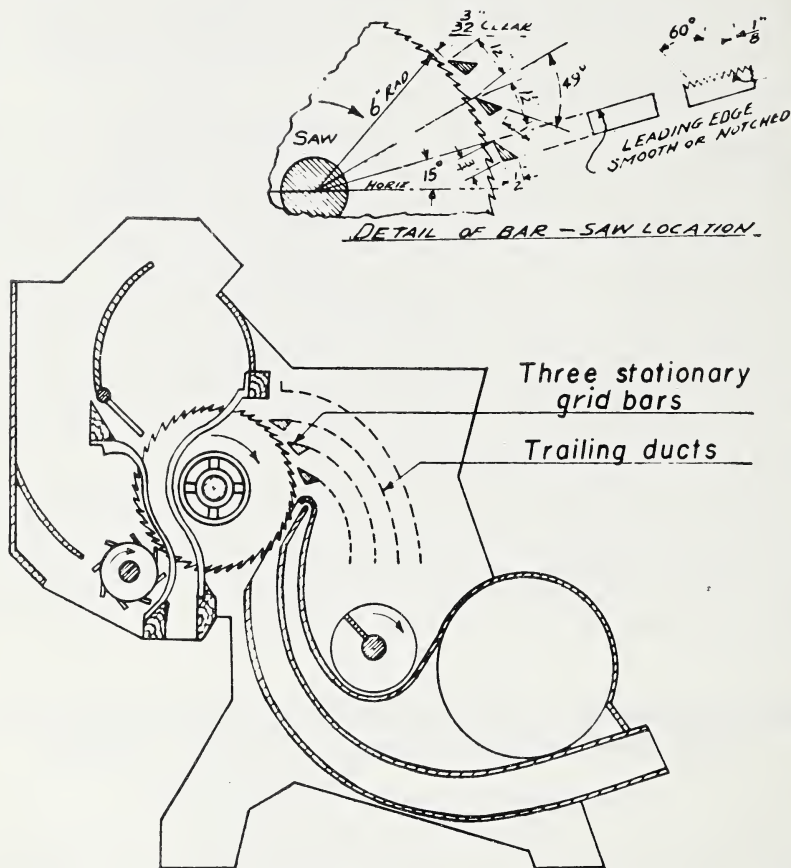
Cross section of a gin stand, showing the location of the grid bars and trailing ducts and detail of the notched grid bars.
